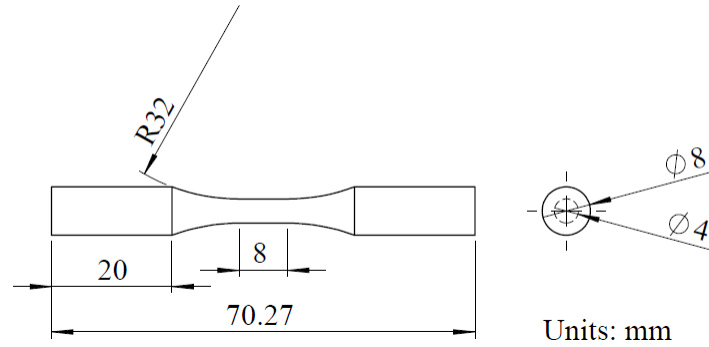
The geometry of the machined specimens following ASTM E466 standards [16].
